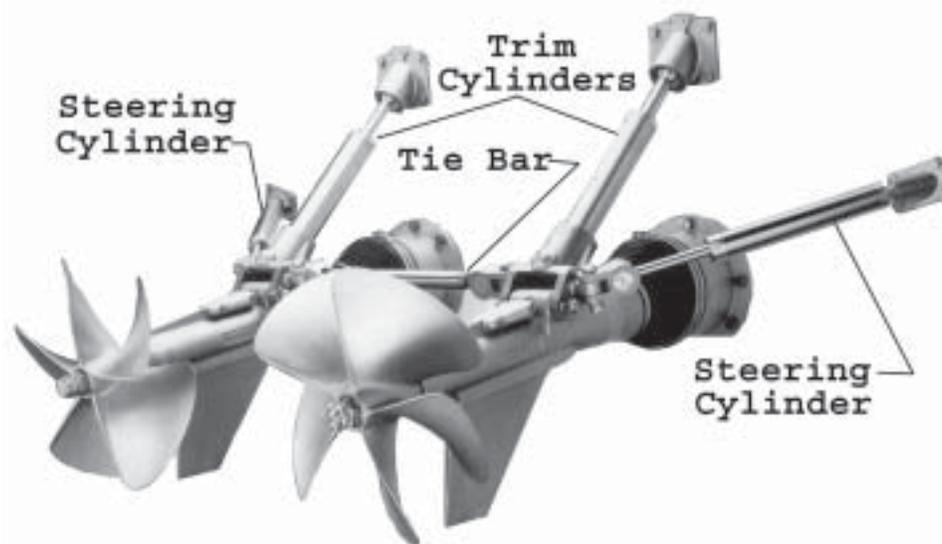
Rear View of Dual Installation Showing Cylinders and Tie Bar
